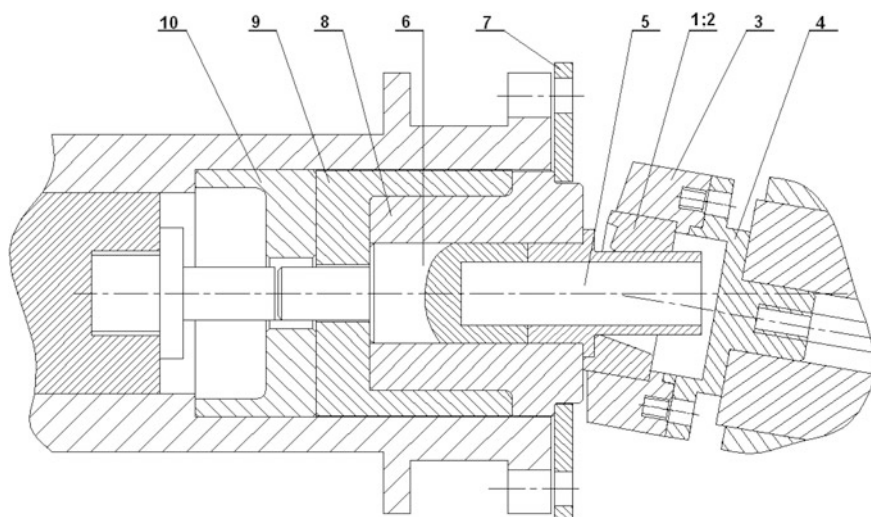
Tool set for axial rotary forging of hollow shaft flanges: 1, 2 forging roll, 3 mandrel, 4 shank, 5 inner mandrel, 6 stop, 7 top, 8 die, 9 cup, 10 base
